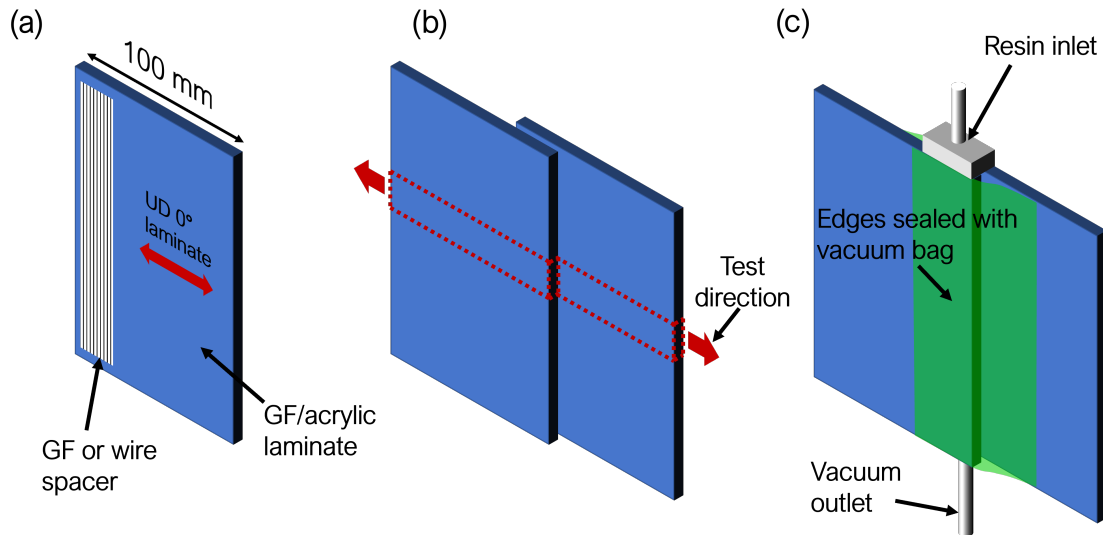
Details of the resin-welding process. (a) Glass reinforcement, or a wire spacer for adhesive and neat-resin bonds, is placed on the adherend then (b) a second adherend is placed on top—the coupon outline and test direction are highlighted—and (c) the weld region is sealed with vacuum bagging and a resin inlet and outlet.
